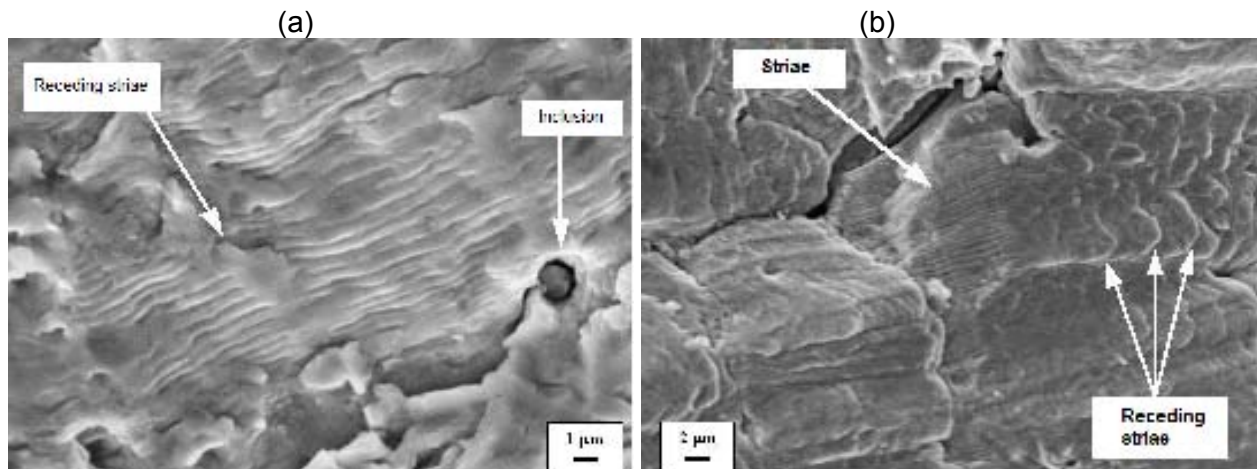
Macrographic aspect of the fracture surface of the test specimens: (a) non-nitrided AISI 304 stress-tested at 400 MPa in 617,400 cycles. Detailed view of the stage II crack propagation striae, spaced at intervals of 0.5 μm ; (b) nitrided AISI 316 stress-tested at 530 MPa and fractured in 708,400 cycles. Striae, and striae receding due to mechanical contact of the test specimen under compression. Image recorded in the region close to the site of ultimate fracture.
